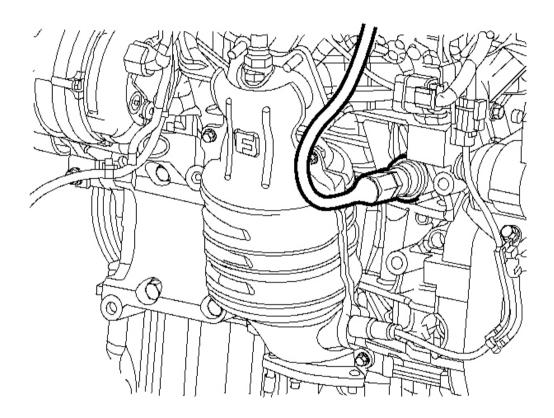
View Of Coolant Heater Power Supply Cord Courtesy of GENERAL MOTORS CORP.
